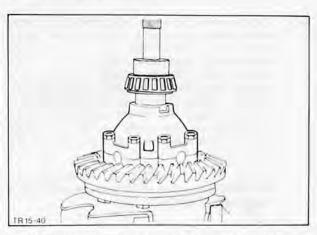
Press on taper roller bearing with special tool no. 15–031
